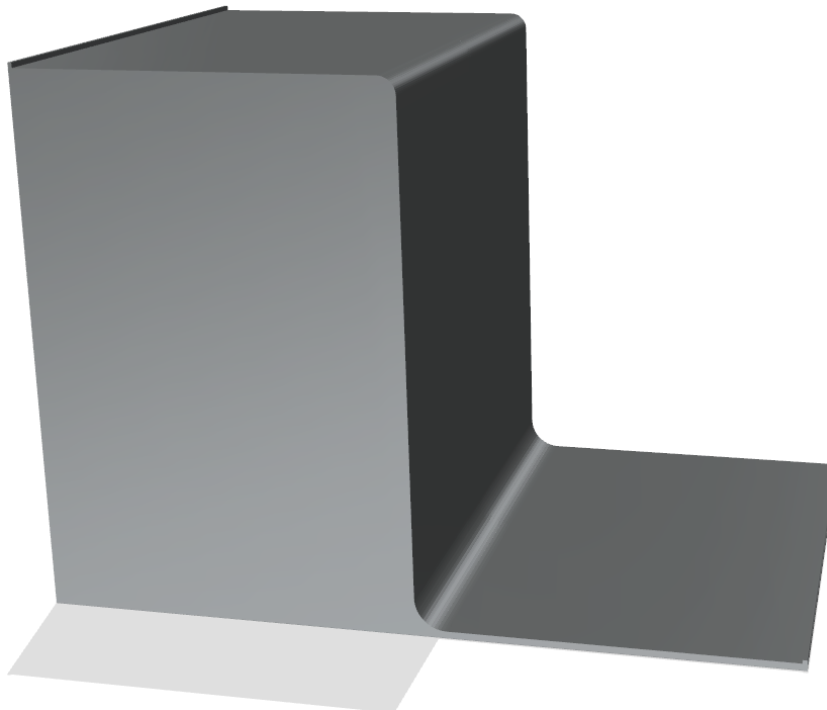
CAD model of the mold obtained using the MM for the Z-shaped part under spring-in deformation.
